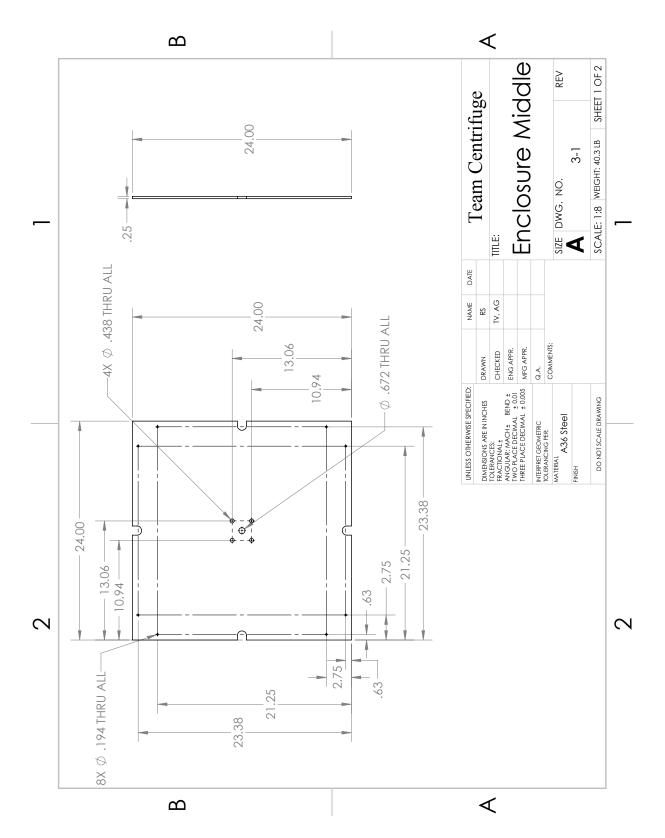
Dimensional Drawing of Enclosure Middle Plate
